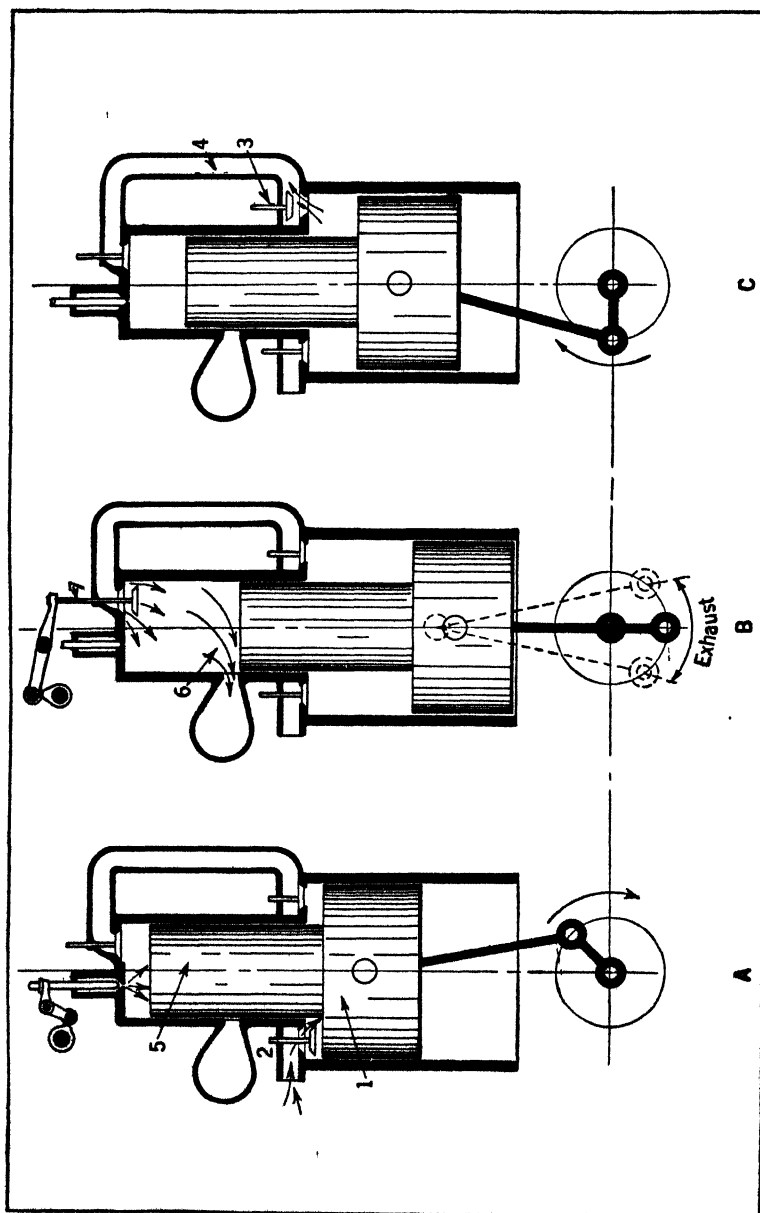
Diagrammatic Arrangement of 2-Cycle Step Piston Type Diesel Engine
